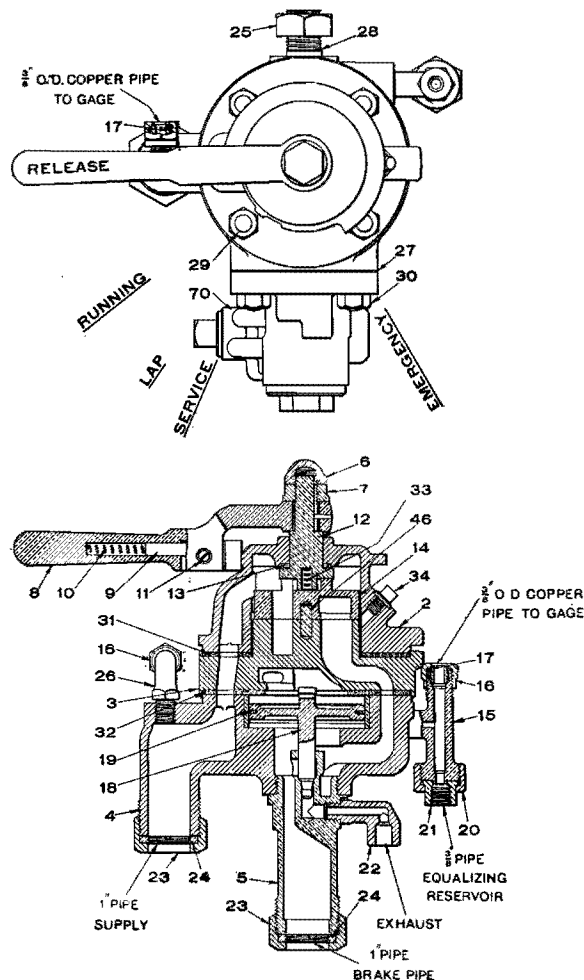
Plan and Sectional Views of the G-6 Brake Valve
